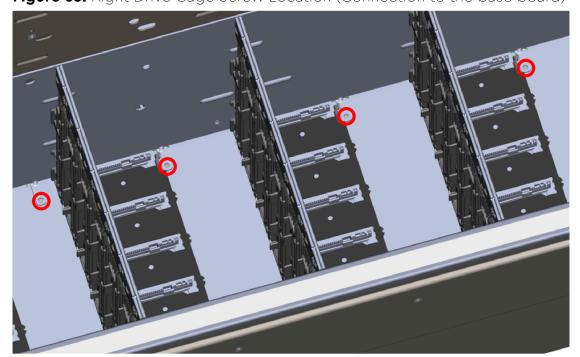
Right Drive Cage Screw Location (Connection to the base board)
